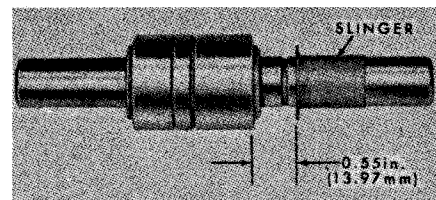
Press new slinger onto shaft so that distance from edge of bearing outer race to slinger is 0.55 inch.
